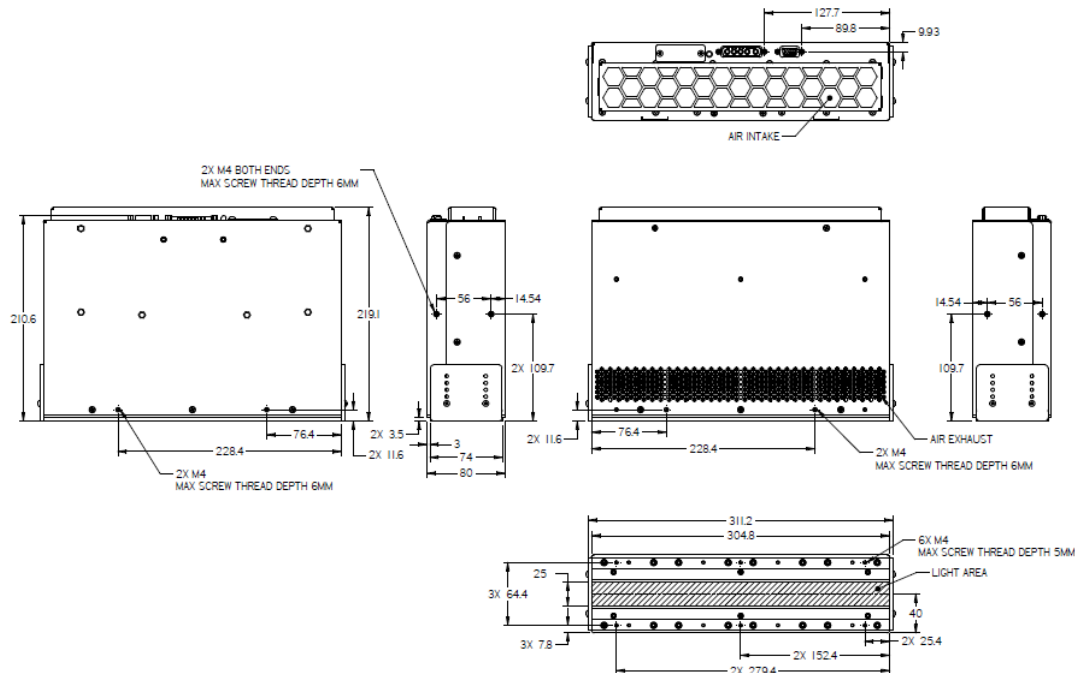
AC8300⁺ UV LED Head Mechanical Drawings
